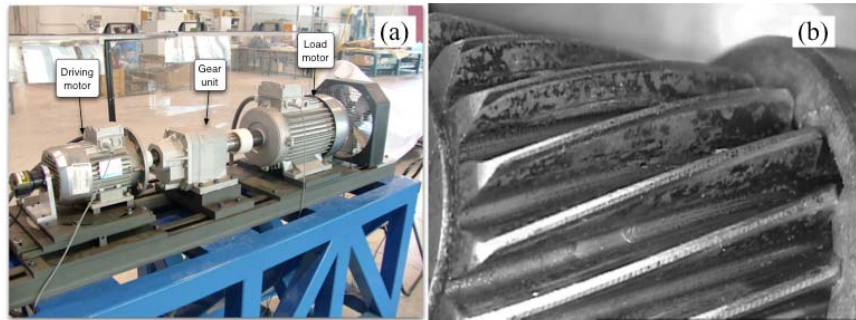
(a) Test bench for gear units and (b) example of a tested gear.
